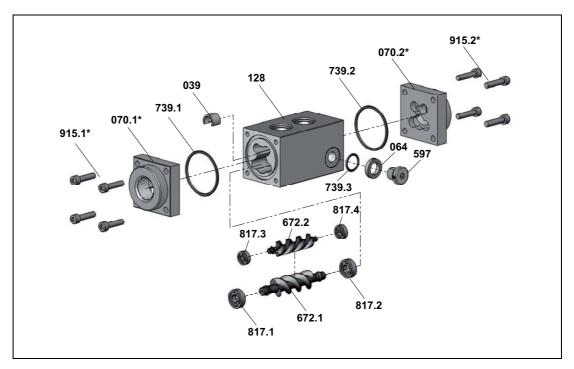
Exploded view OME 13 - 32 Pipe thread connection
